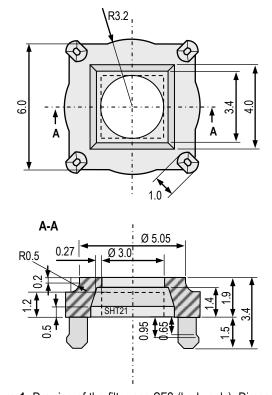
Drawing of the filter cap SF2 (body only). Dimensions are given in mm (1mm = 0.039inch), tolerances are ±0.1mm. Add 0.15 to total height due to the filter membrane. The cavity inside the cap fits to SHT2x sensors. Additional space for solder joints are left open around the sensor.
